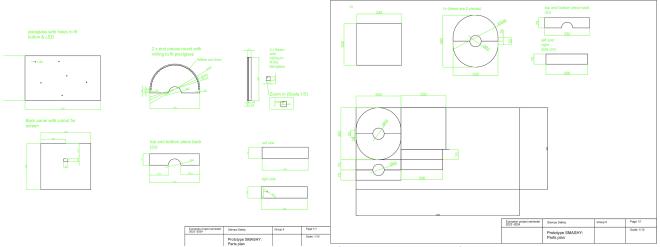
Parts plan prototype prototype smashy details-v2.pdf
